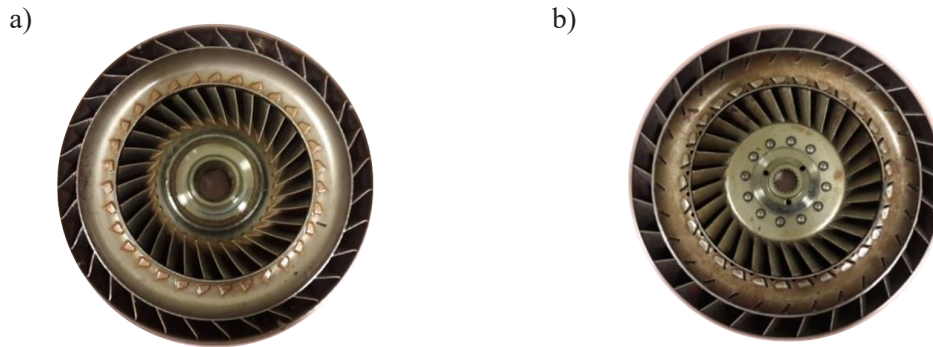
View of the HC rotors: a – the pump, b – the turbine
